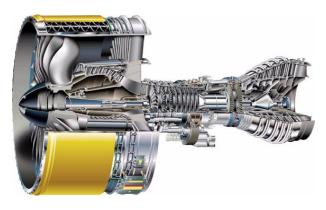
A cross-sectional view of a jet engine showing blades and vanes.
